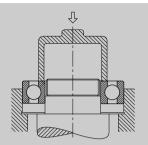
Pressing of a Bearing when Tight-Fitting a Inner Ring
